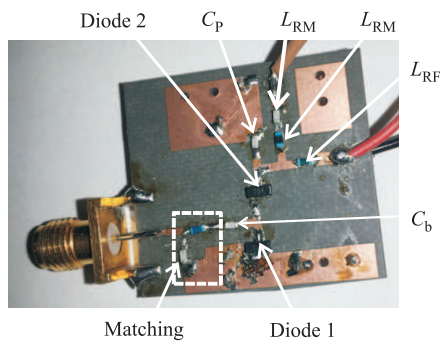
Photograph of the prototype rectifier and modulator implemented with lumped elements soldered on the PCB.
